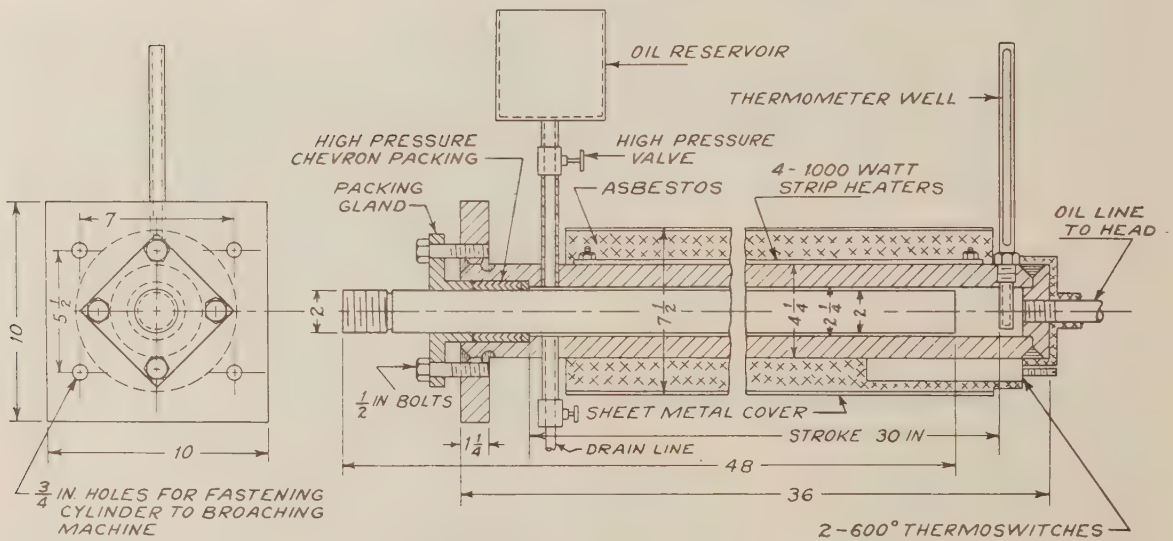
DETAIL OF OIL-DISPLACEMENT CYLINDER FOR HOT HYDRAULIC BULGING
